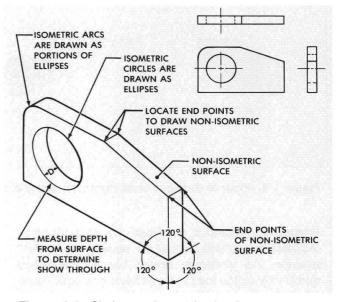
Circles on isometric drawings appear as ellipses. Non-isometric surfaces are drawn by locating their end points.
